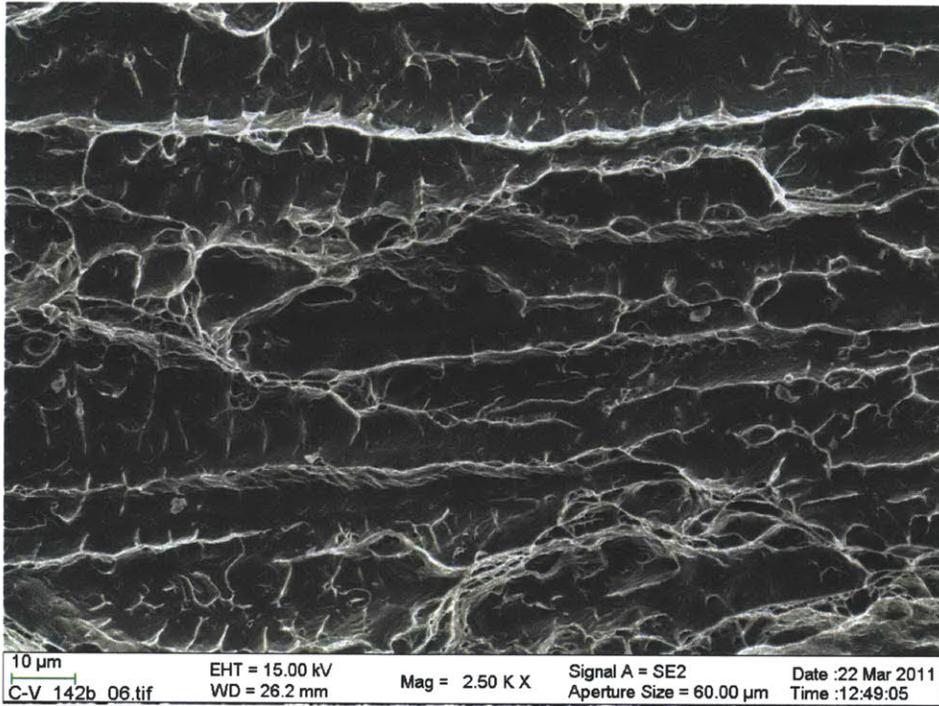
As-welded Charpy-V specimen, tested at 288°C fractograph showing ductile austenite and brittle δ -ferrite.
